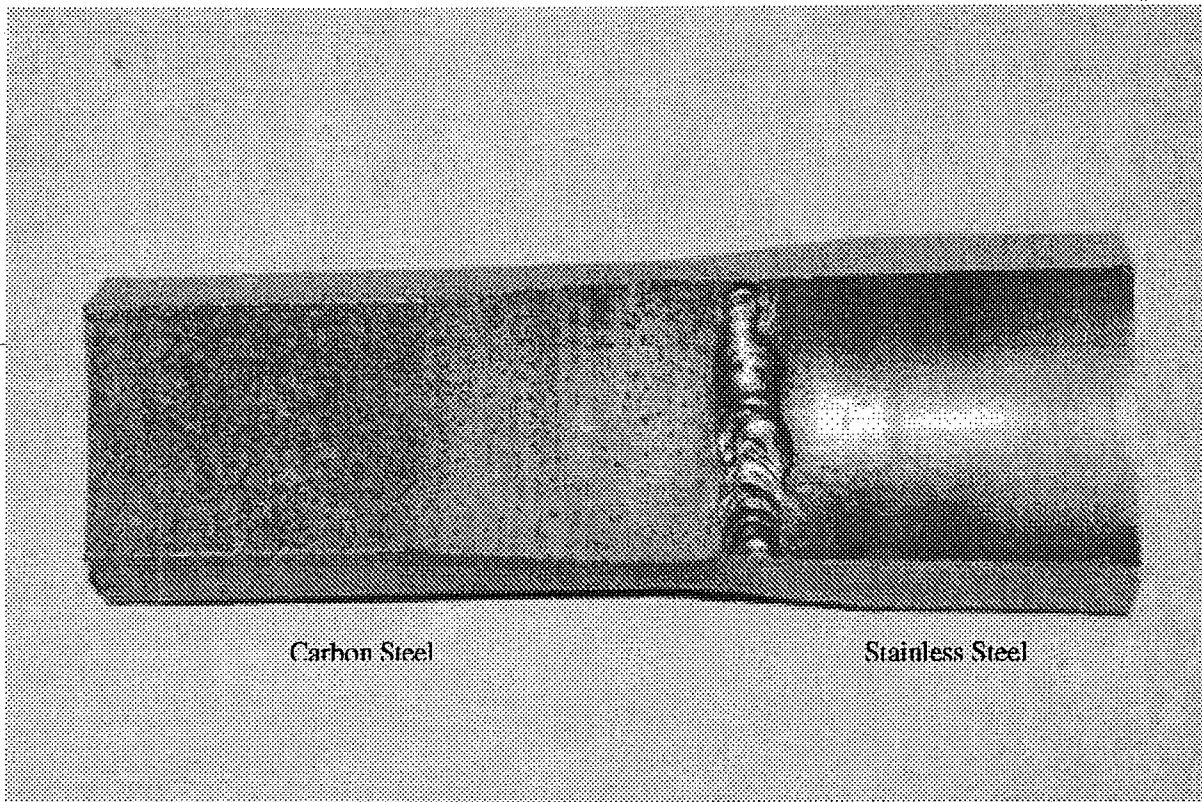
Appearance of the ID Surface Condition of the Weld in the As-received Sample
